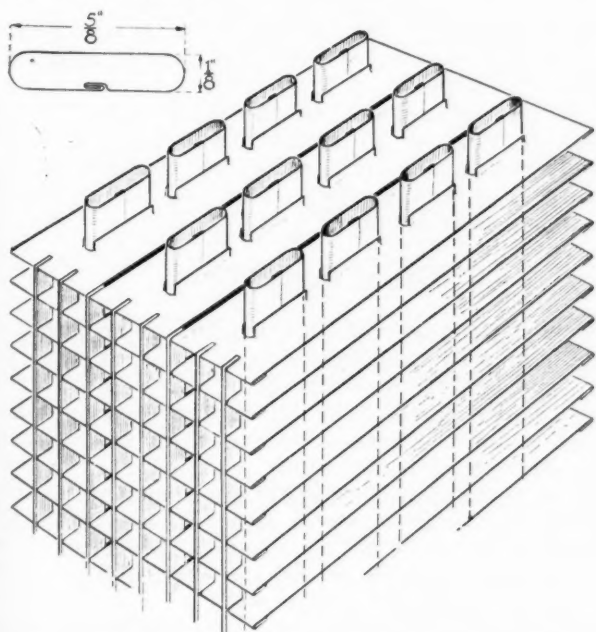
Sketch of a portion of the Bush fin and tube core, showing section of the tube with double-locked seam
